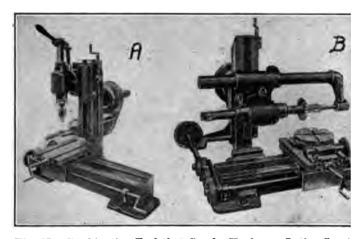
Combination Tool that Can be Used as a Lathe, Sensi or Milling Machine, Useful for the Small Repair Shop
